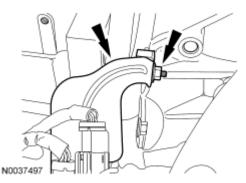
Locating Engine Wiring Harness Bracket And Nut Courtesy of FORD MOTOR CO.
